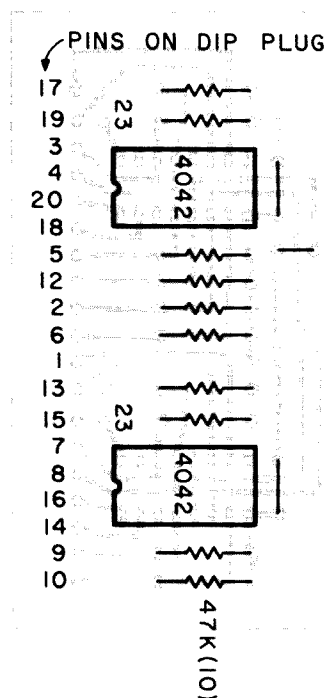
Component side of PC board, latch. Note: Pin 1 of 4042s is at bottom of layout.
